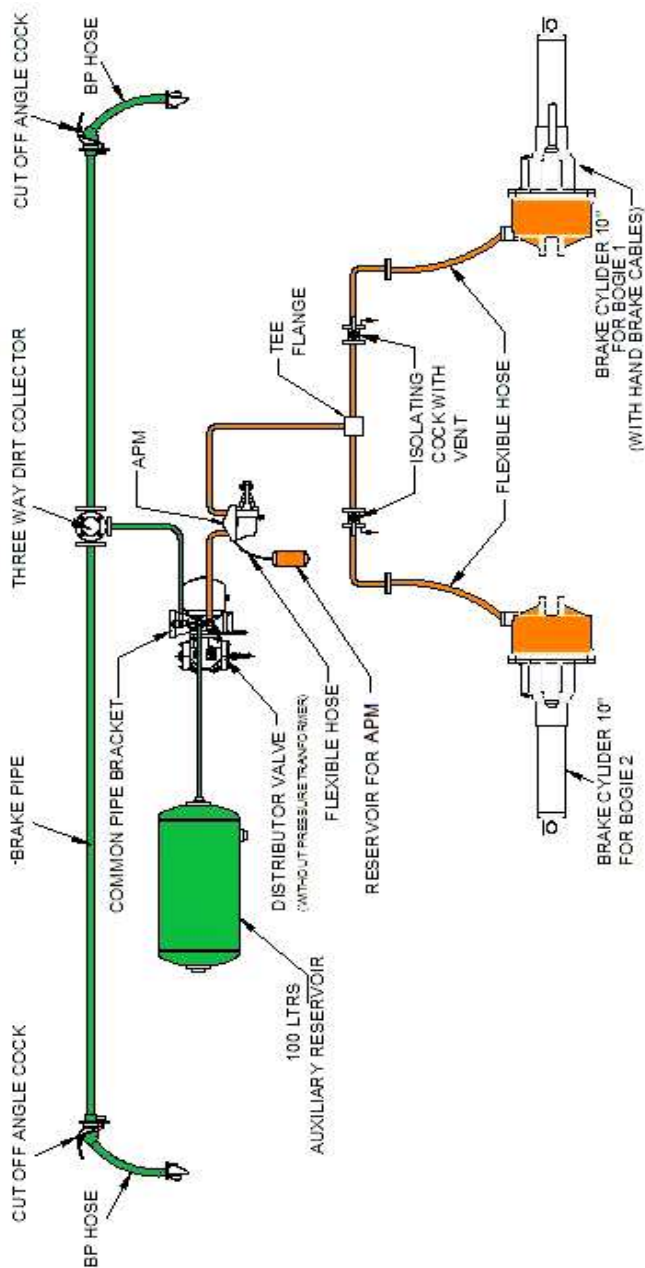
LAYOUT OF SINGLE PIPE AIR BRAKE SYSTEM
